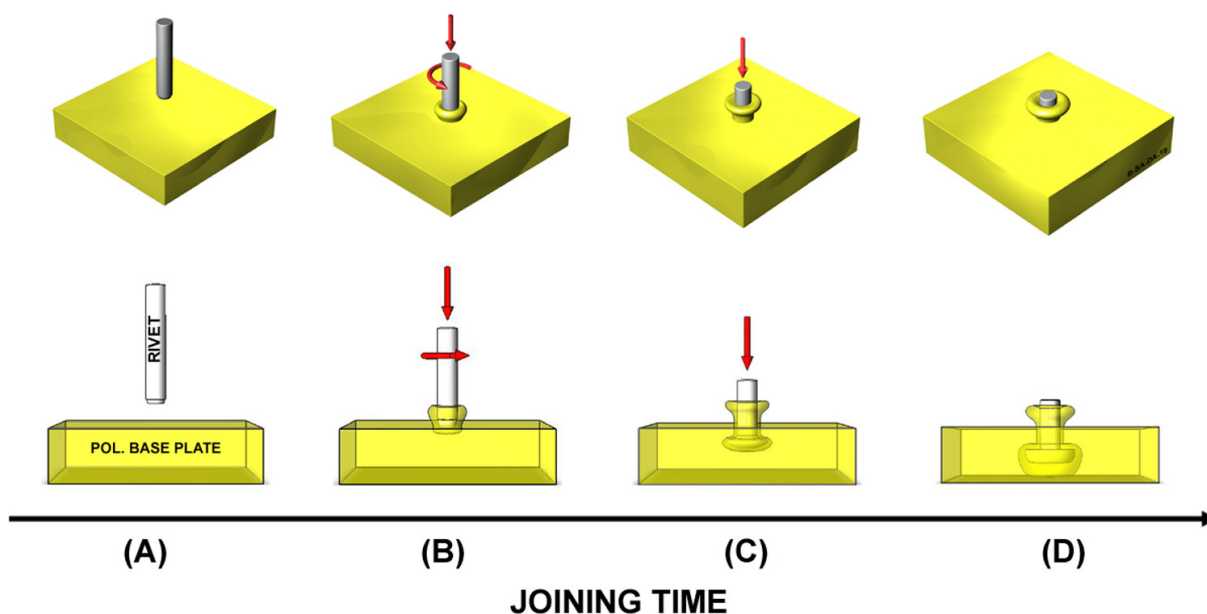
Friction riveting process scheme as illustrated for “point-on-plate” joints. A) Positioning and clamping of joining partners. B) Insertion of rotating rivet into the polymeric base plate. C) Rotation braking and subsequently rivet forging. D) Cooling and joint consolidation.
